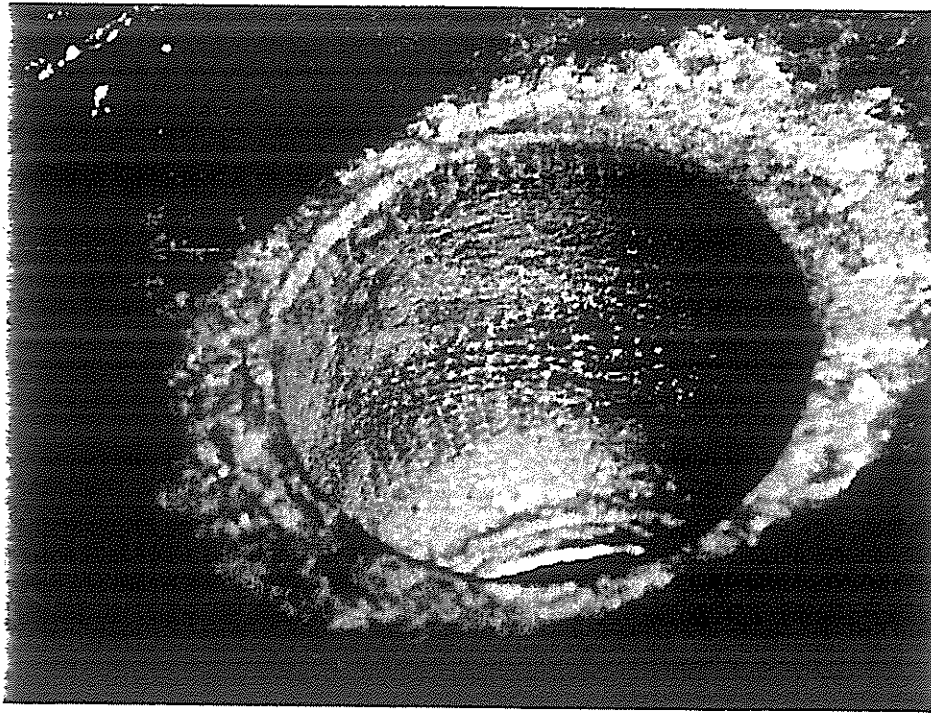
Location 4 – serration marks were found extending for the entire length of the hole and the surface was worn, which removed all paint
